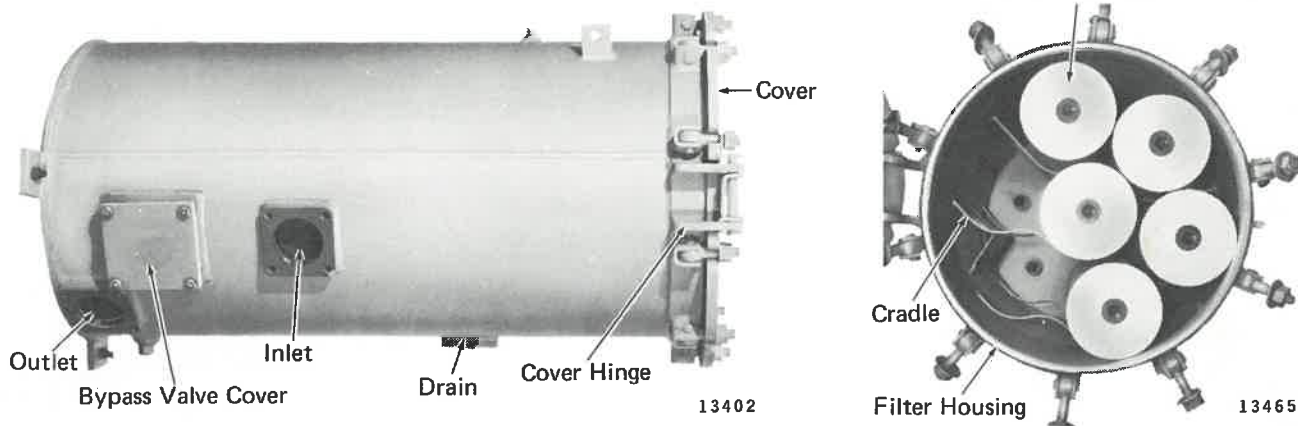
Seven Element Lubricating Oil Filter Assembly
